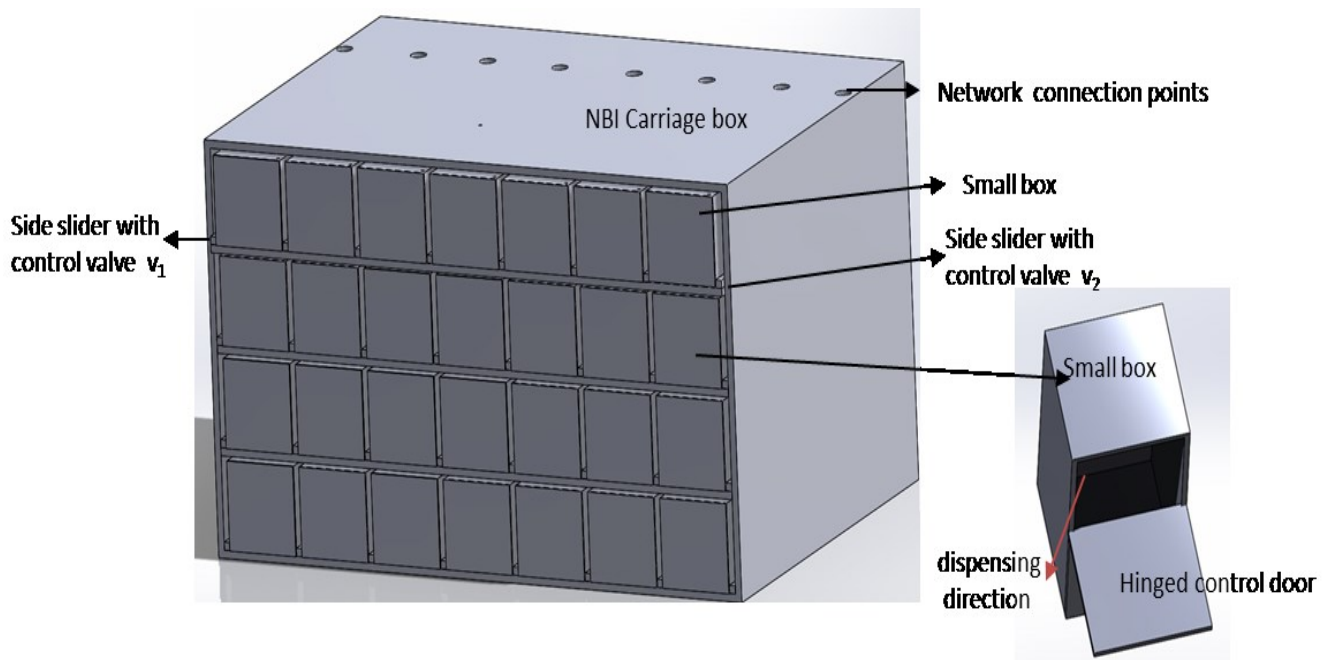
4 Proposed Pest UAV NBI Dispenser Carriage Box (PUCB) design
